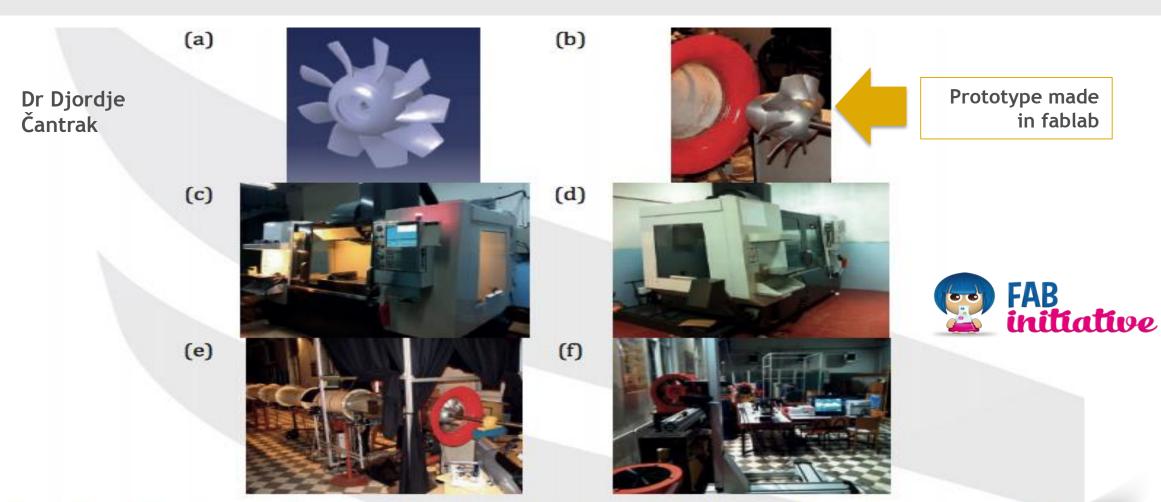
(a) CAD model of the axial fan impeller; (b) Axial fan impeller. [2] (c-d) CNC machines at the UB FME: (c) 4-axis; (d) 5-axis.e-f) Test rigs with new experimental equipment at the UB FME: (e) Stereo PIV system; (f) LDA system.
